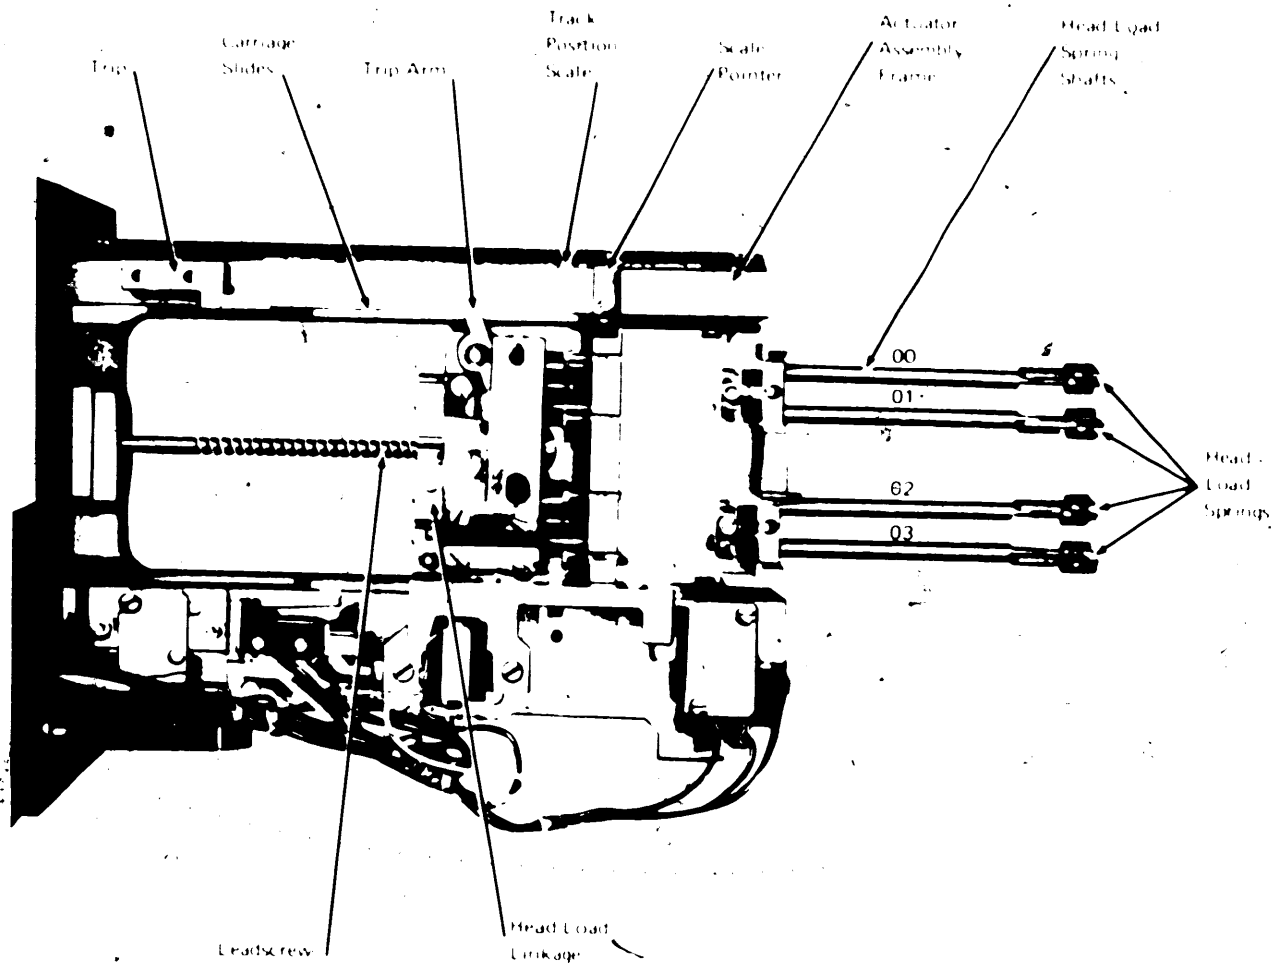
Carriage and Actuator Assembly - Without Heads (107477)
